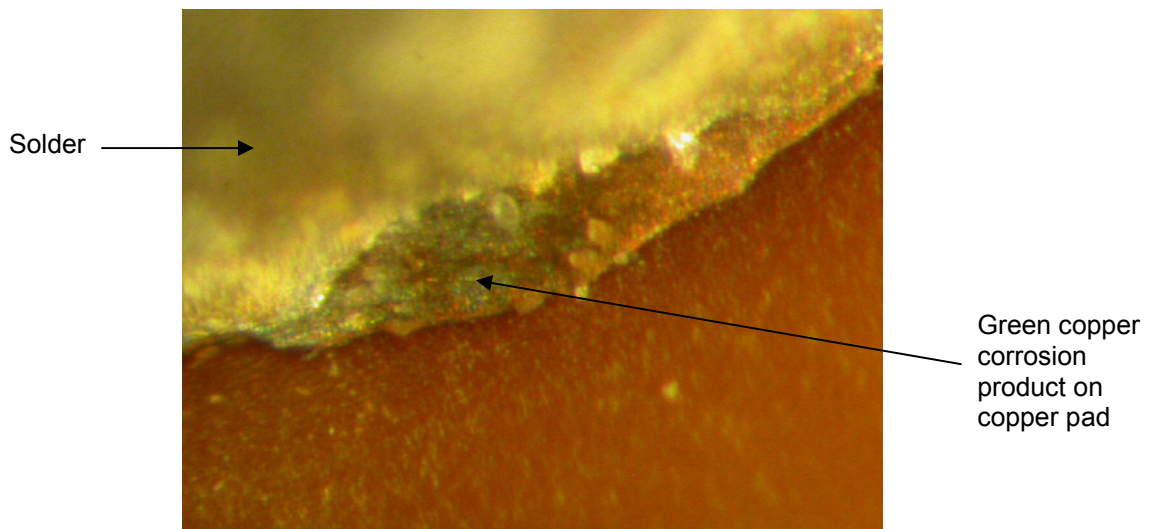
Corrosion of a copper pad at the edge of solder from equipment exposed to anaesthesia gases
